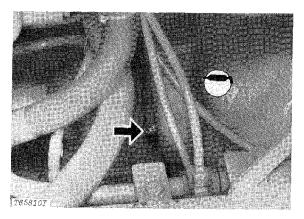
Engine Disconnect Clutch Bearing (1 Point)
